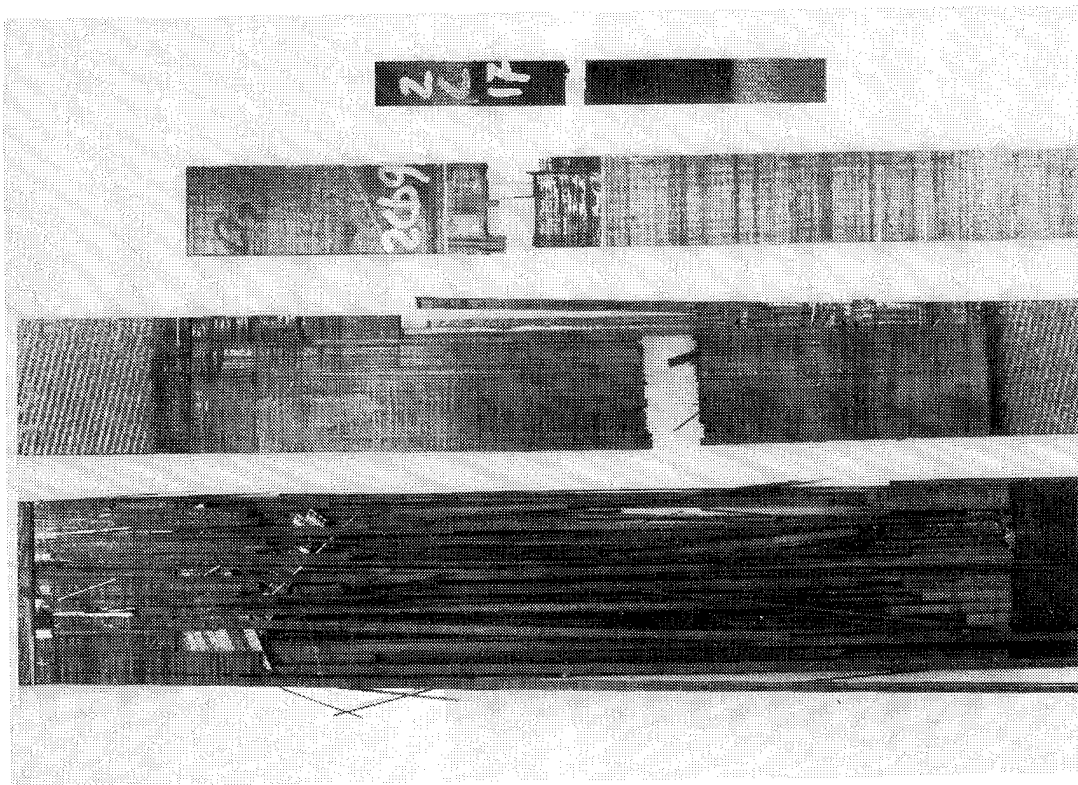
Typical failures in four scaled size specimens of Laminate C loaded in tension.
